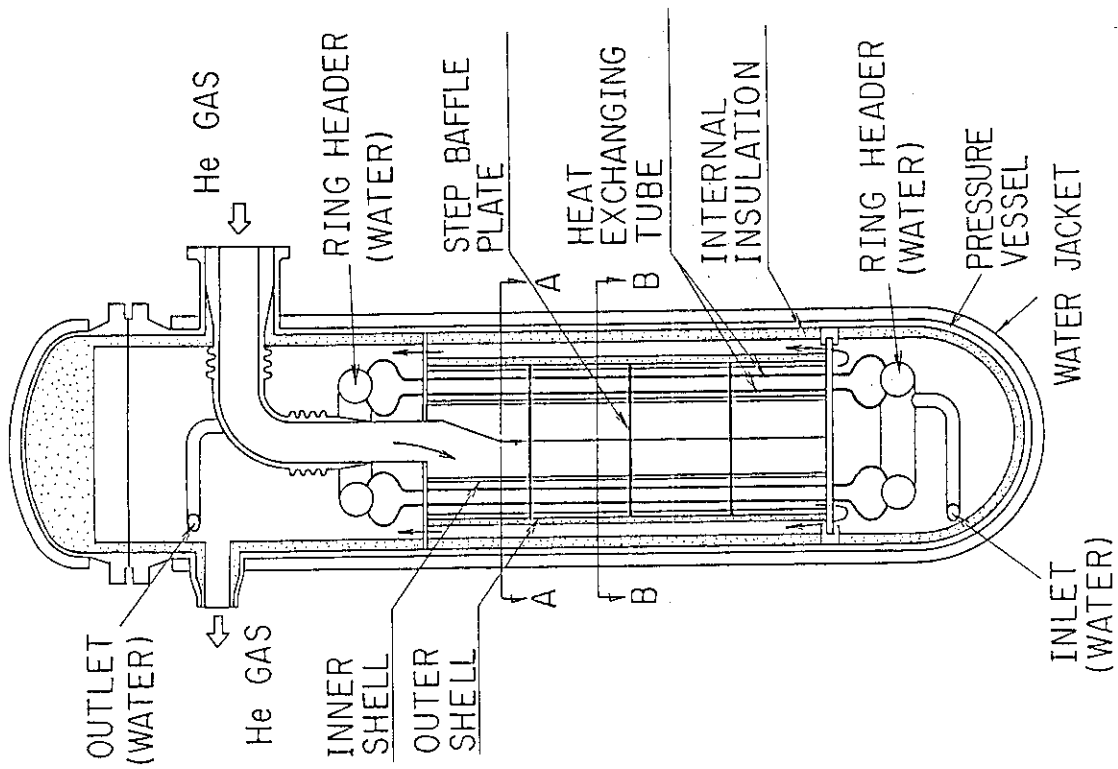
Schematic Drawing of He Gas Cooler (C31)
